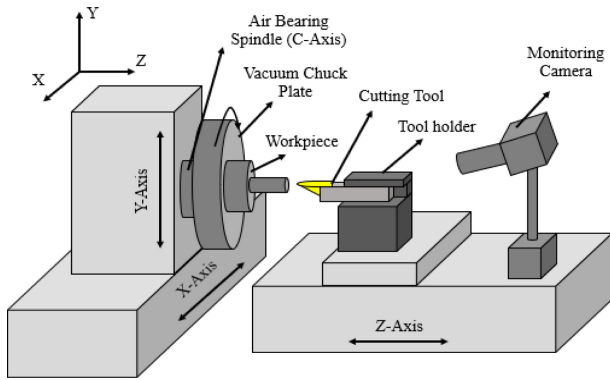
Schematic of diamond turning to fabricate the core mold for the aspherical lens
